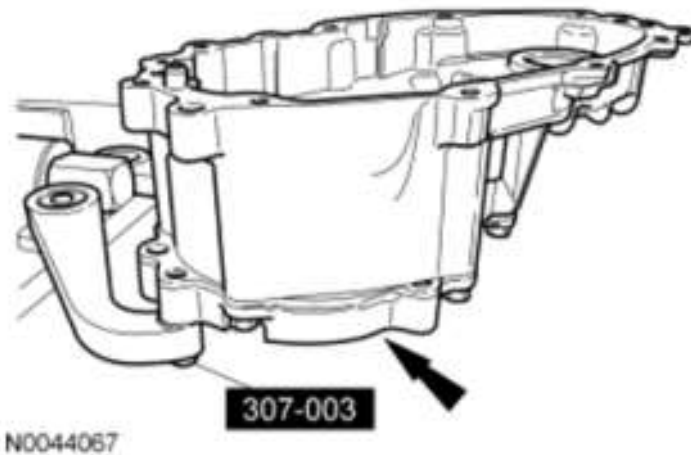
Attaching Front Case To Transmission Holding Fixture
